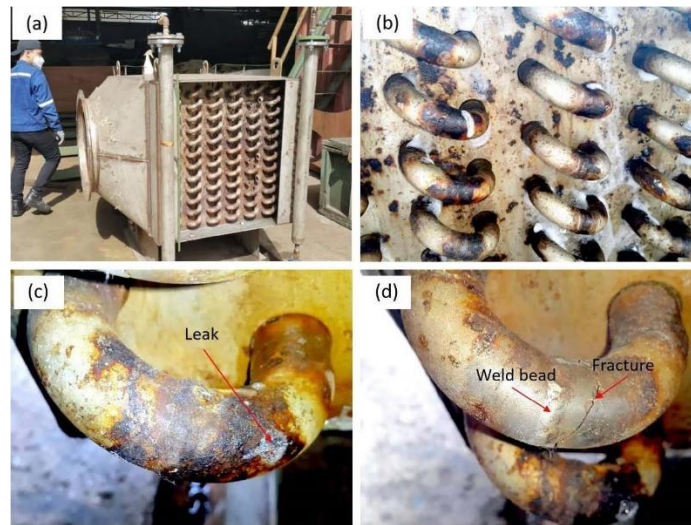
Camera photographs on boiler economizer; (a) header tube, (b) close-up views on defected u-bend tubes, (c) leaked area as indicated by the small white bubbles and (d) transverse crack adjacent to the weld bead.
